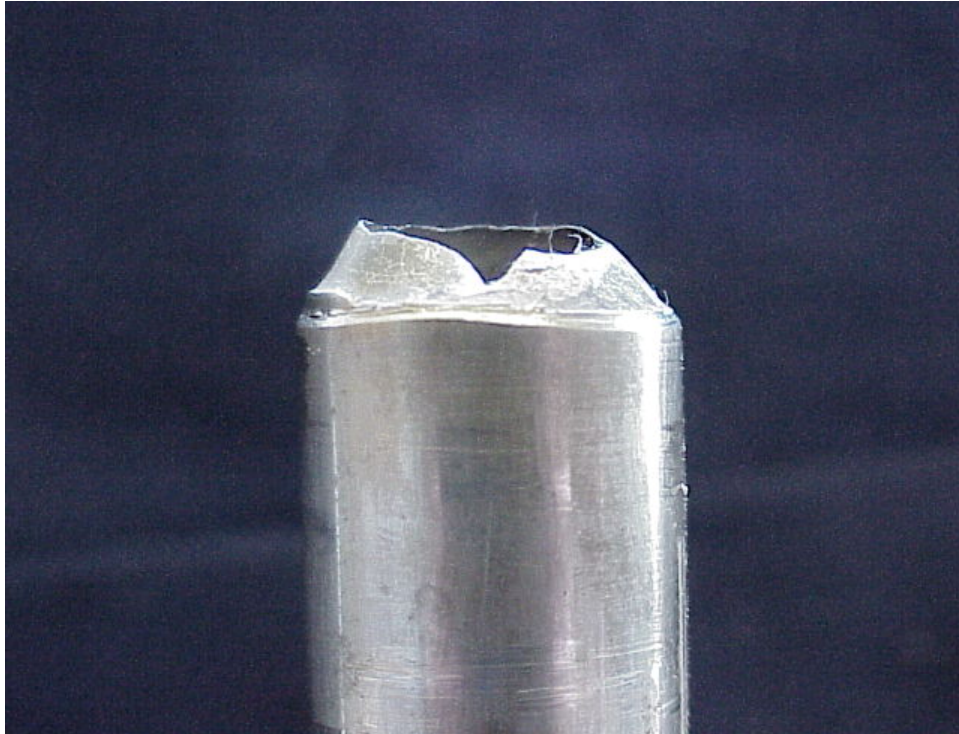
Upper Spindle Fracture Surface (Side View)
